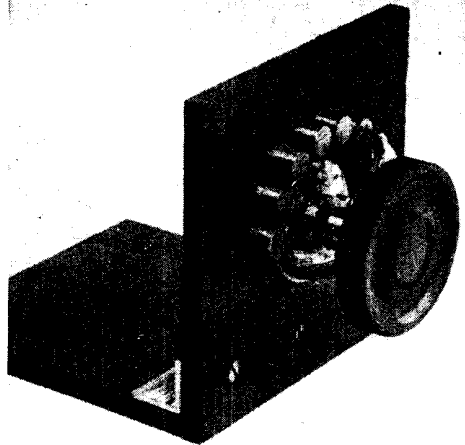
Screws holding the panel to the brass angle piece should be countersunk, as shown. The studs and contact arm are also seen
